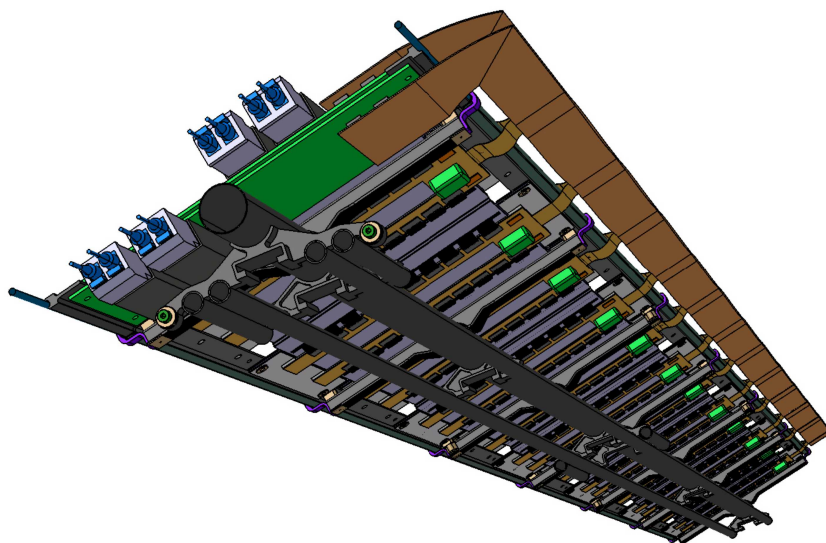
CAD model of the DSM130 module prototype installed including the Super Module (SM) Controller module (SMC) at the end of the SM.
